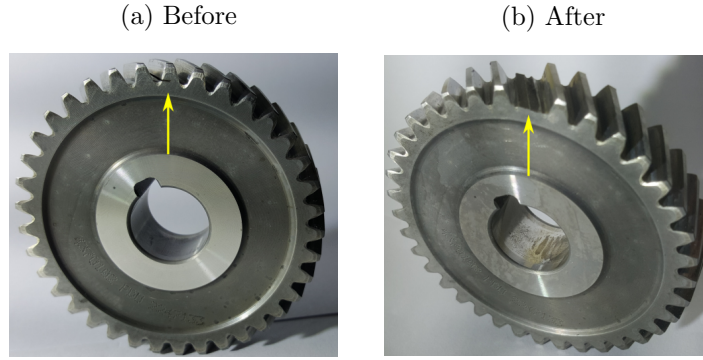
The gear that was used in the localised gear damage experiment. The gear before the fatigue experiment was started is shown in Figure 6(a) and after the test was completed is shown in Figure 6(b).
